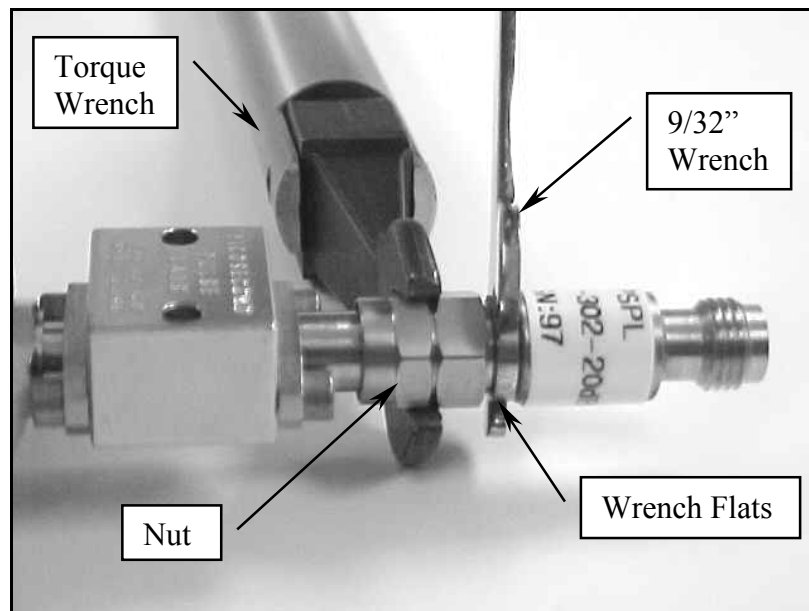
Proper placement of wrenches for assembling and disassembling 1.85mm connectors
